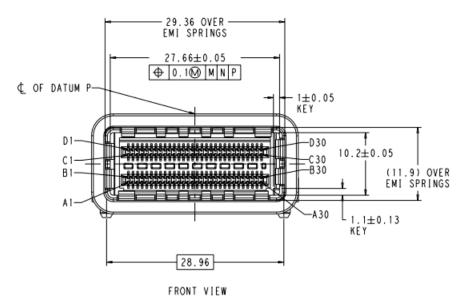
X16 Through-Hole Cage/Connector Assembly
